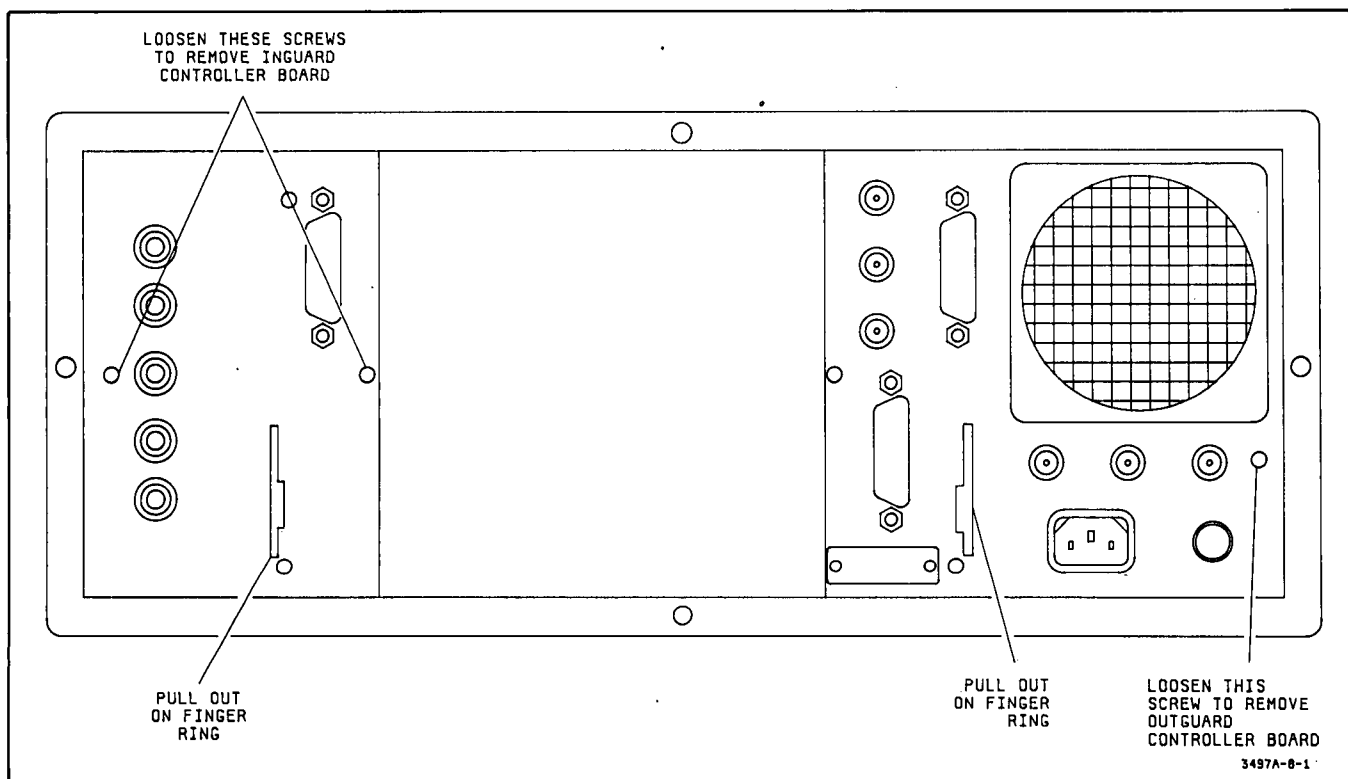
Outguard and Inguard Boards Mounting Screws and Finger Rings
